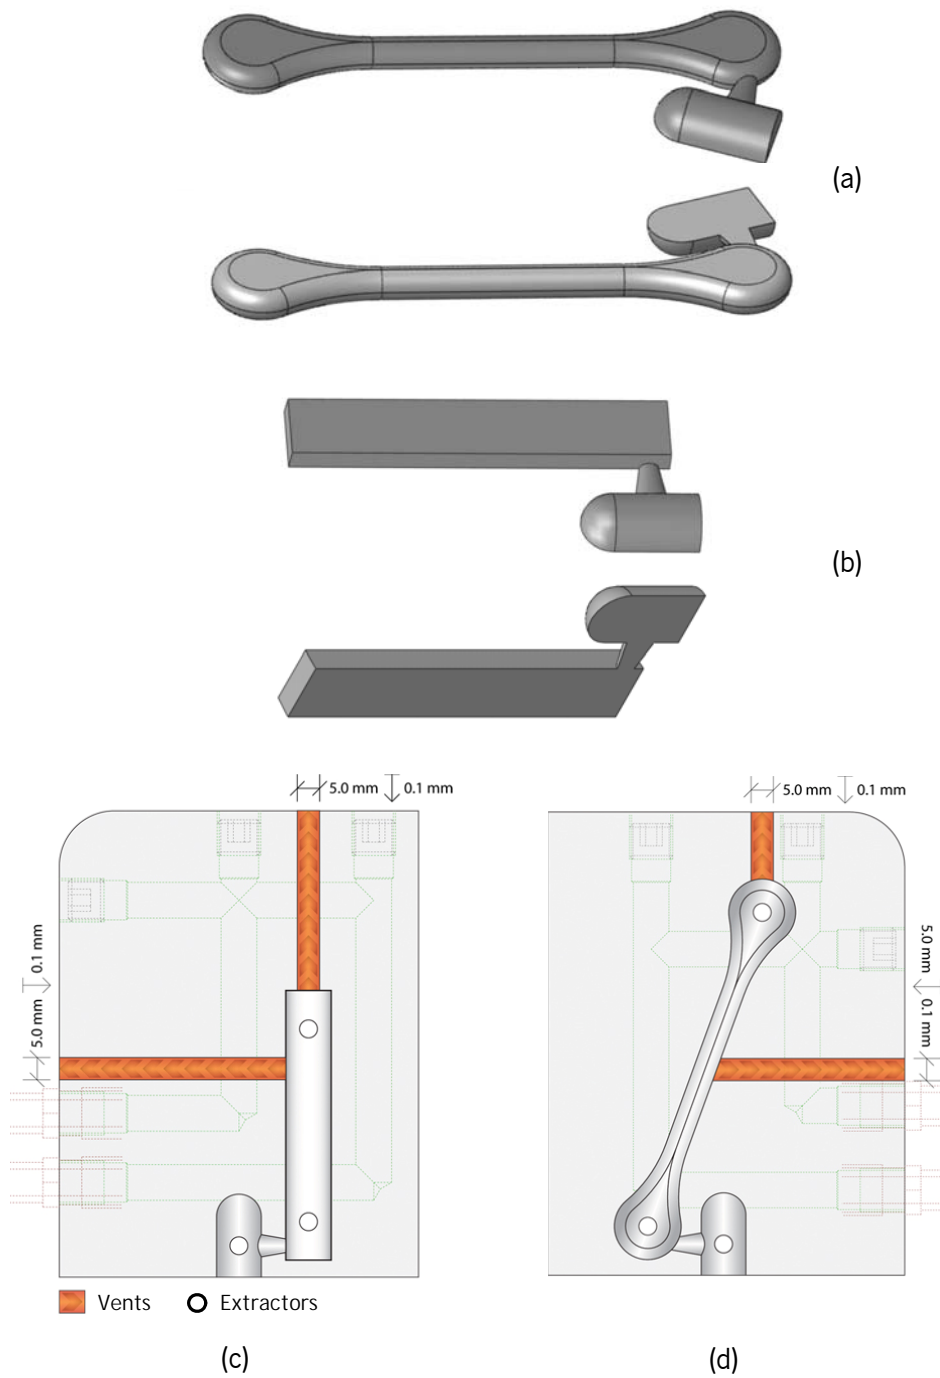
3D views of mouldings and gating areas, (a) tensile specimen and (b) flexure specimen, and drawings of the respective top-view inserts, mounted in ejection mould side.
